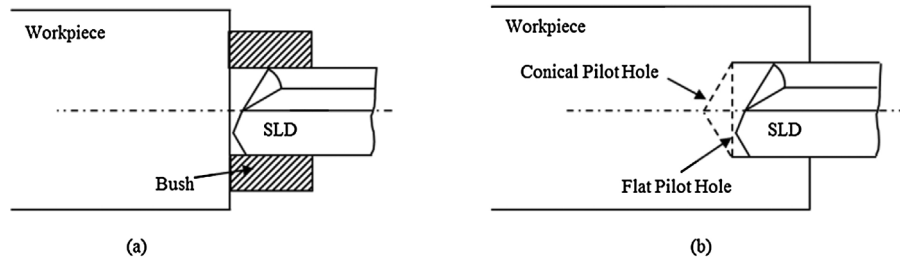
(a) Conventional deep hole drilling set-up with pilot bush. (b) Deep hole drilling with flat or conical pilot hole profile.
